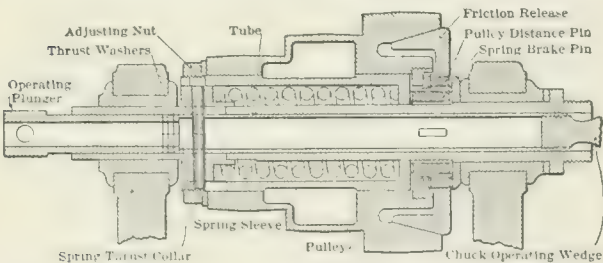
Details of the Stop and Open Design of Spring Operated Chuck.
